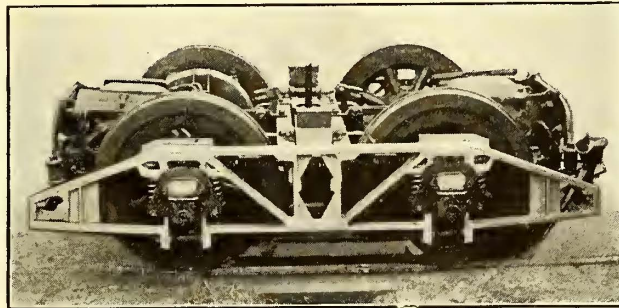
ALL-WELDED STREET RAILWAY TRUCK USED BY THE GOVERNMENT RAILWAYS, SYDNEY, AUSTRALIA
